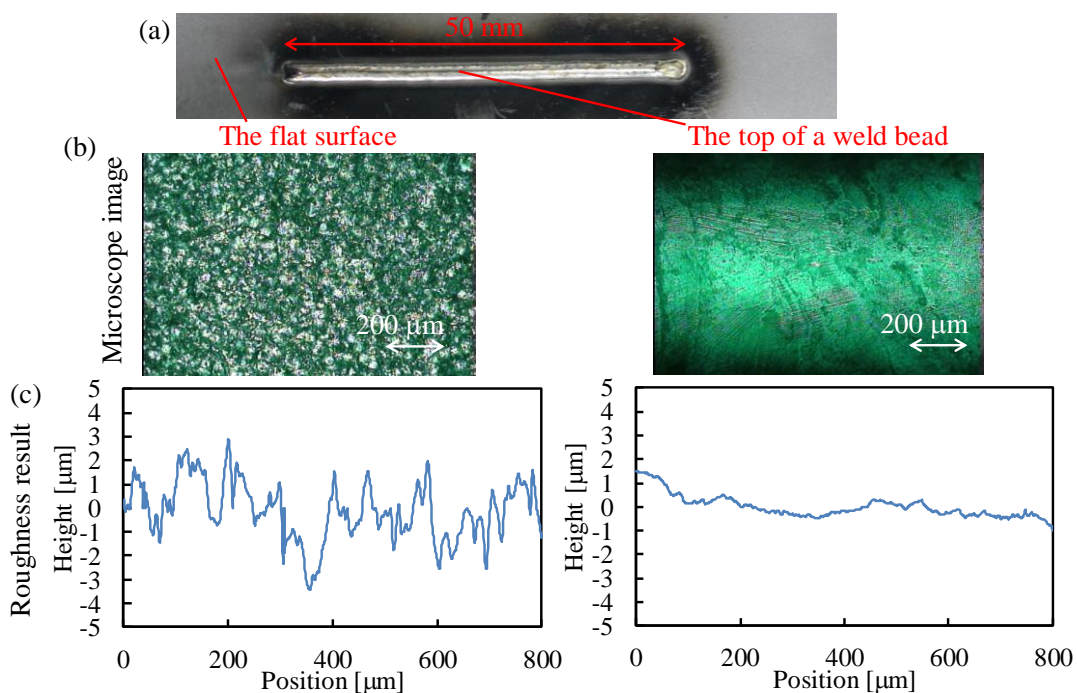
Detail of workpiece used for the evaluations. Work piece has flat surface and a weld bead: (a) camera images, (b) microscope images and (c) roughness measurement results by NewView 8000 (Zygo Co., Ltd.).
